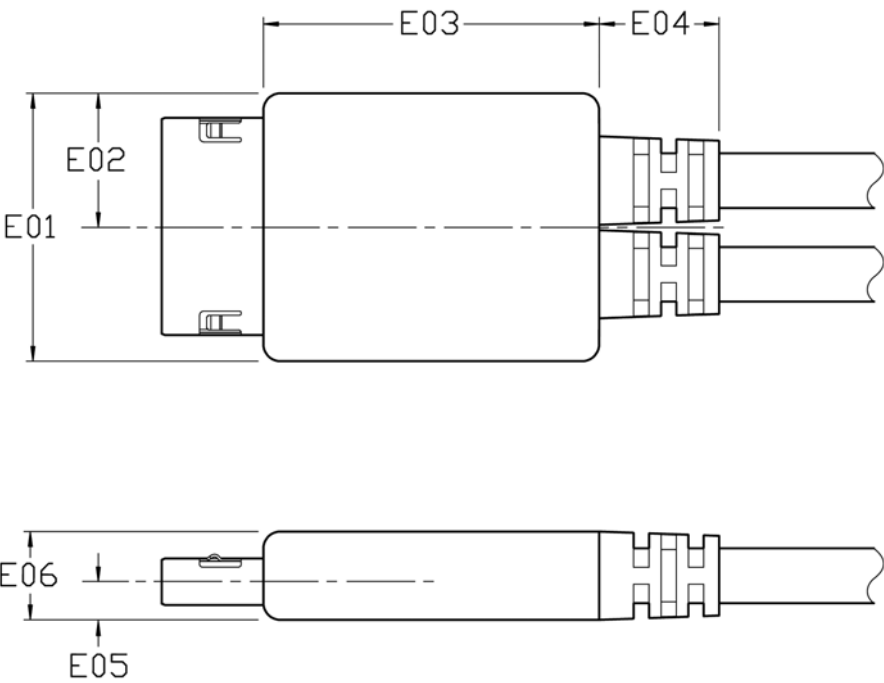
FREE EXTERNAL CABLE ASSEMBLY
